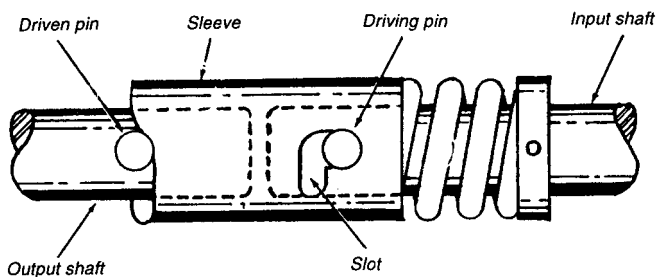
A cammed sleeve connects the input and output shafts of this torque limiter. A driven pin pushes the sleeve to the right against the spring. When an overload occurs, the driving pin drops into the slot to keep the shaft disengaged. The limiter is reset by turning the output shaft backwards.
